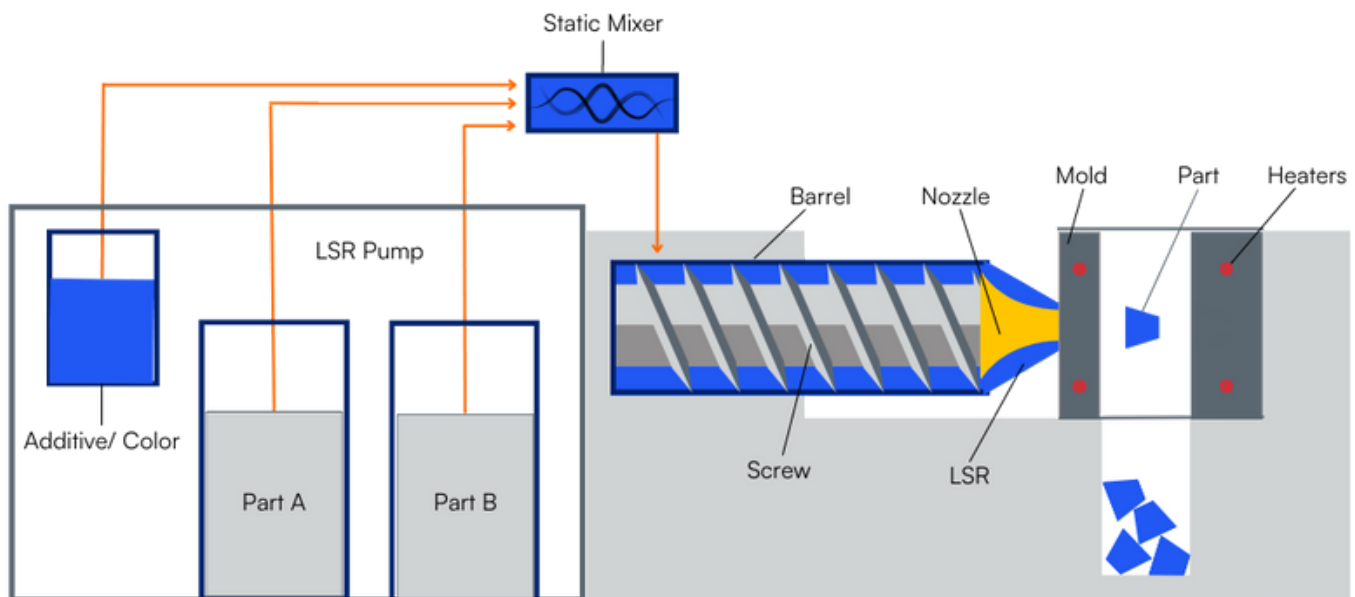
Schematic drawing of LSR LIM machine with two bucket pump system, barrel, screw, and mold with heaters inside.
